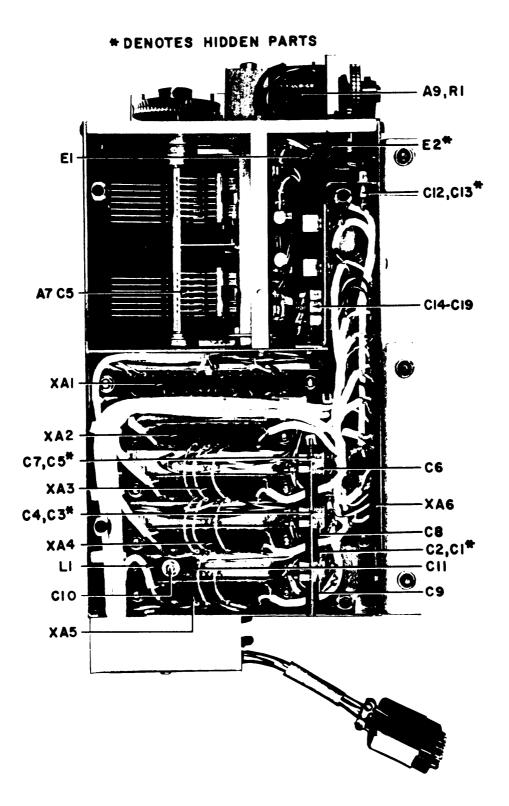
Type WJ-9120 0.5-30 MHz Tuner Assembly, Bottom View, Location of Components
